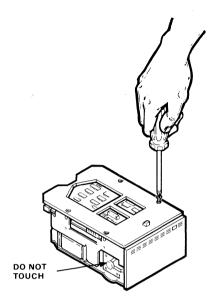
RD51 Disk Drive Skid Plate Removal
